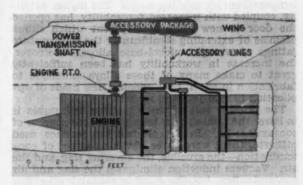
Side view of remotely driven accessory arrangement. The accessories are removed from the engine pods and located in the wing remote from high heat.
